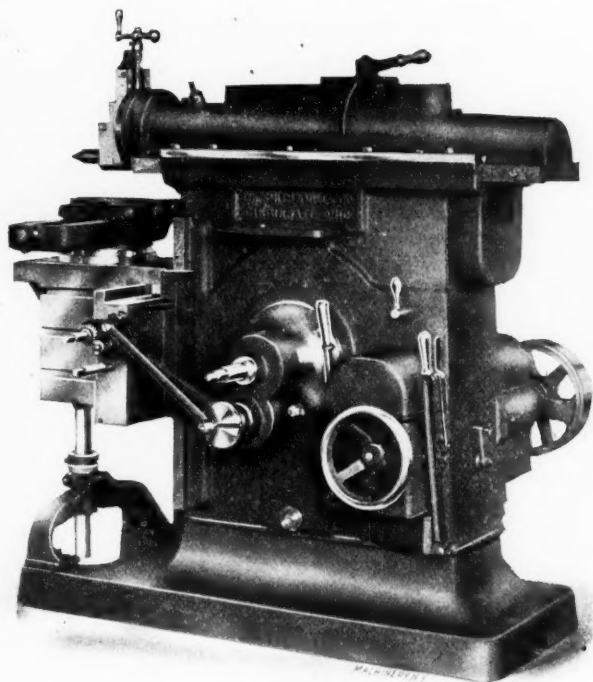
Smith and Mills Variable All-gear Drive Back-gear Crank Shaper
